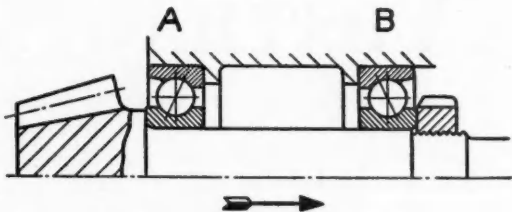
Diagram of helvel - pinion shaft mounted on two axial-contact ball bearings
